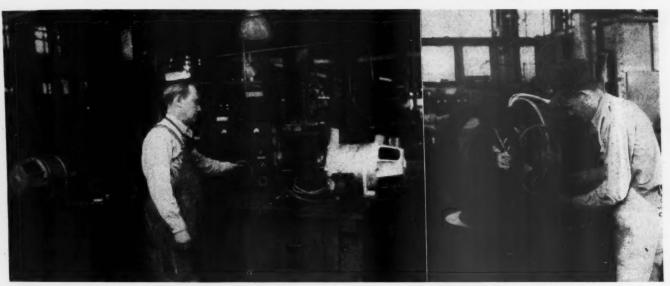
(left)—Steam generator electrical equipment and repair stand. Fig. 11 (right)—Headlight test stand
